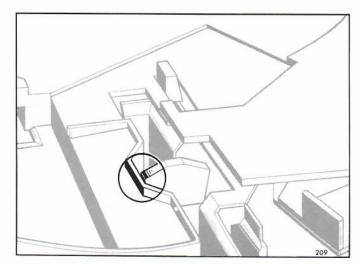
ADJUST SLIDE LIFT LEVER
